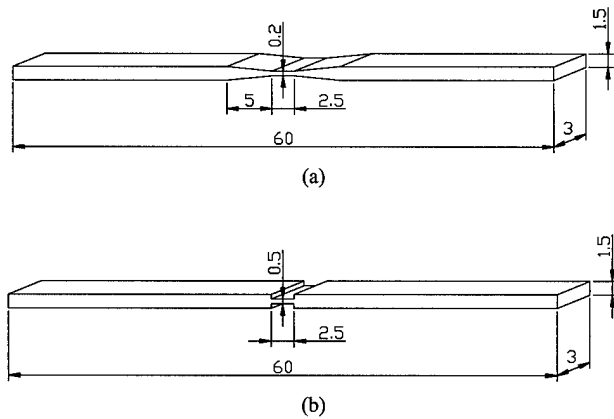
Specimen dimensions for dynamic tensile and compressive tests: (a) tensile test specimen; (b) compressive test specimen.
